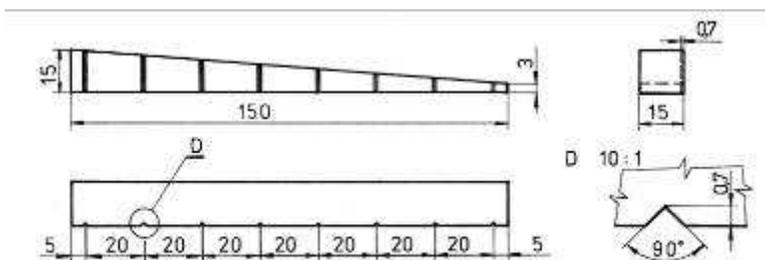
Initial shape of a wedge-shaped sample (side wall and ground plan)
